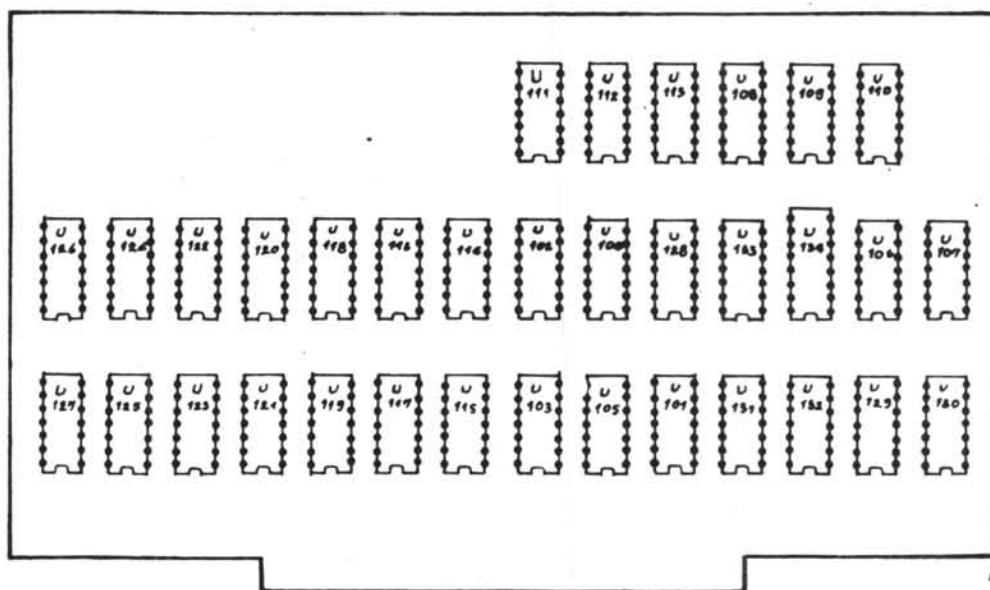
Point, unit, and ranging encoder (AS:8)-1, Components lay out
